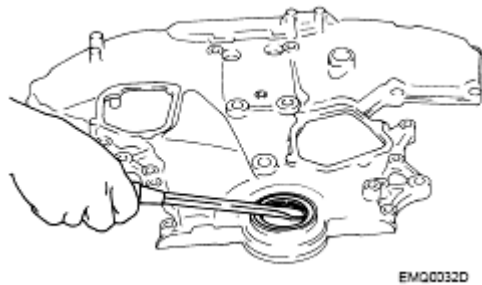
Removing Front Oil Seal From Front Timing Chain Case
